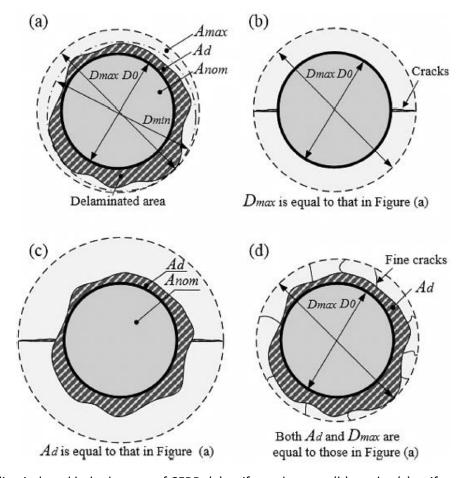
Drilling induced hole damage of CFRP: (a) uniform damage, (b) cracks, (c) uniform damage with cracks and (d) uniform damage with fine cracks [70]
